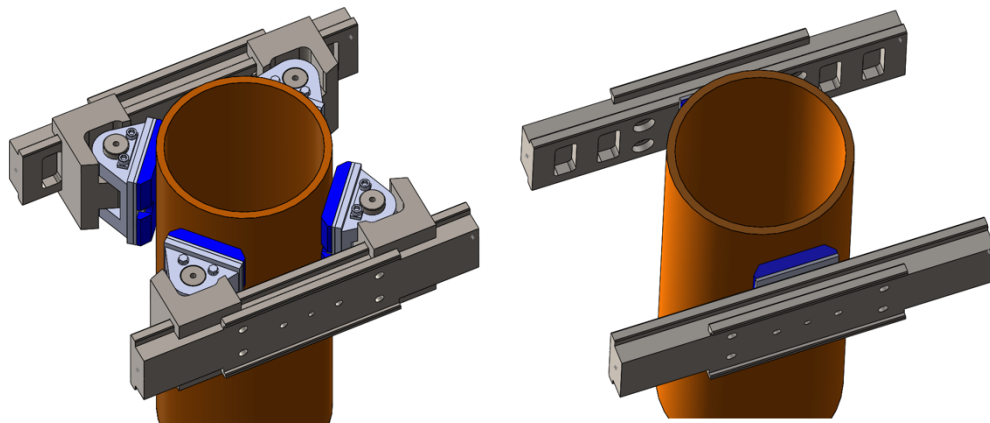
Two new setups with the new test crossie that mimics the Pioneering Spirit tensioner setup
